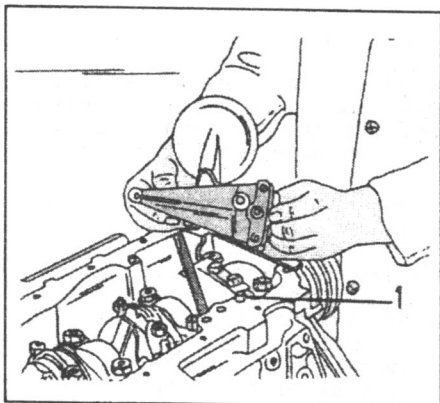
Removal of the oil pump. A dowel sleeve (1) locates the pump on the crankcase face.
